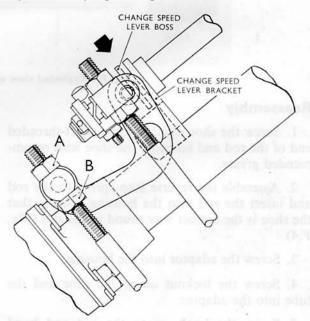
Selector lever setting details. On four-speed transmissions, with reverse gear engaged, check that clearance exists between the change speed lever boss and the lever bracket, indicated by arrow
